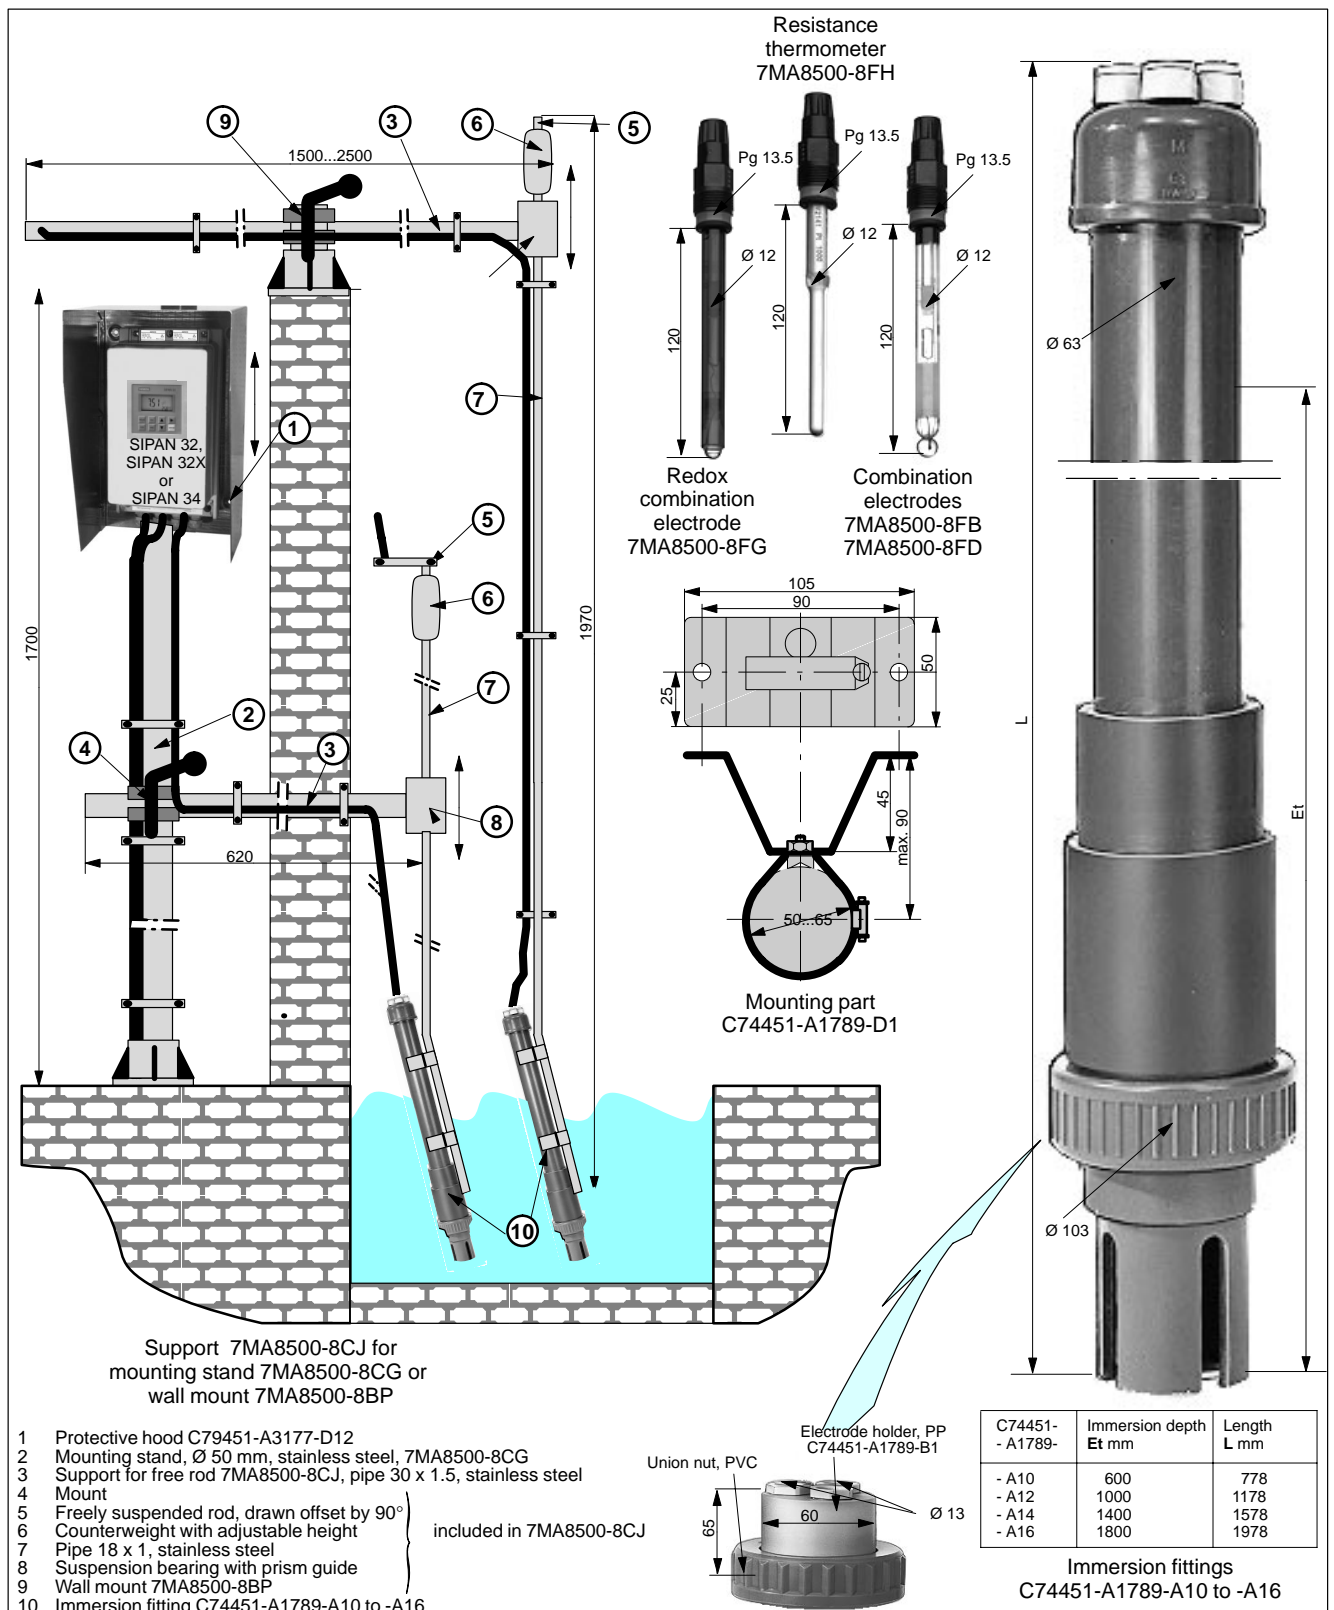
/26 Sensors and fittings for pH and ORP measurements in basins or open vessels, dimensions in mm
